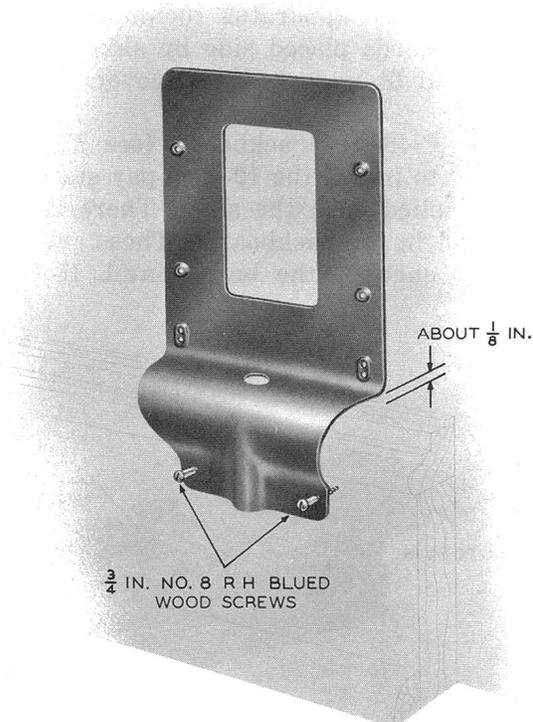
Mounting 156A Metal Backboard on Wooden Baseboard
